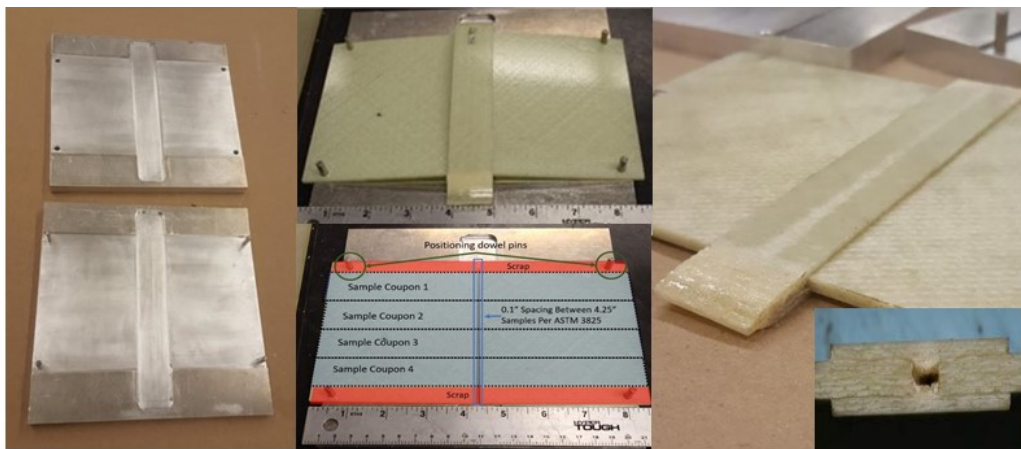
ASTM specimen assembly dies (left), fusion bonding specimen fabrication on the die (center), after bonding (right) and coupon cross section (inset)
